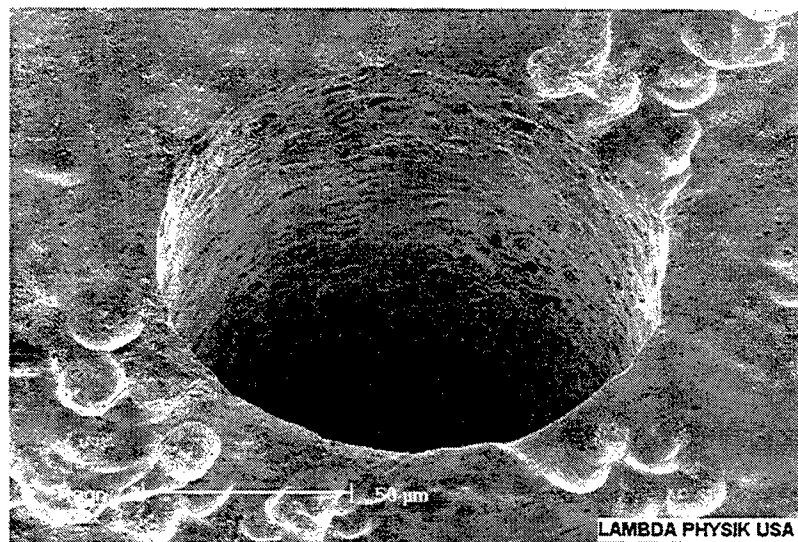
Close-up view of hole trepanned in 0.75 mm-thick carbon steel with 4W UV beam
